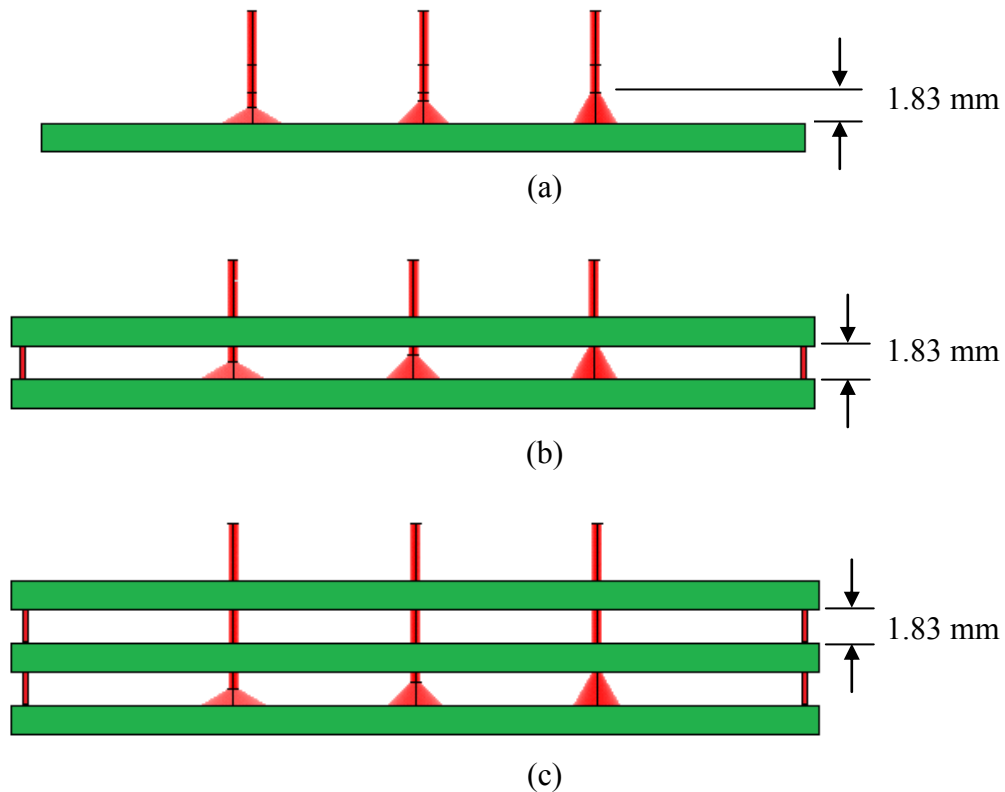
PCB assemblies: (a) no cover, (b) one cover, (c) and two covers.
